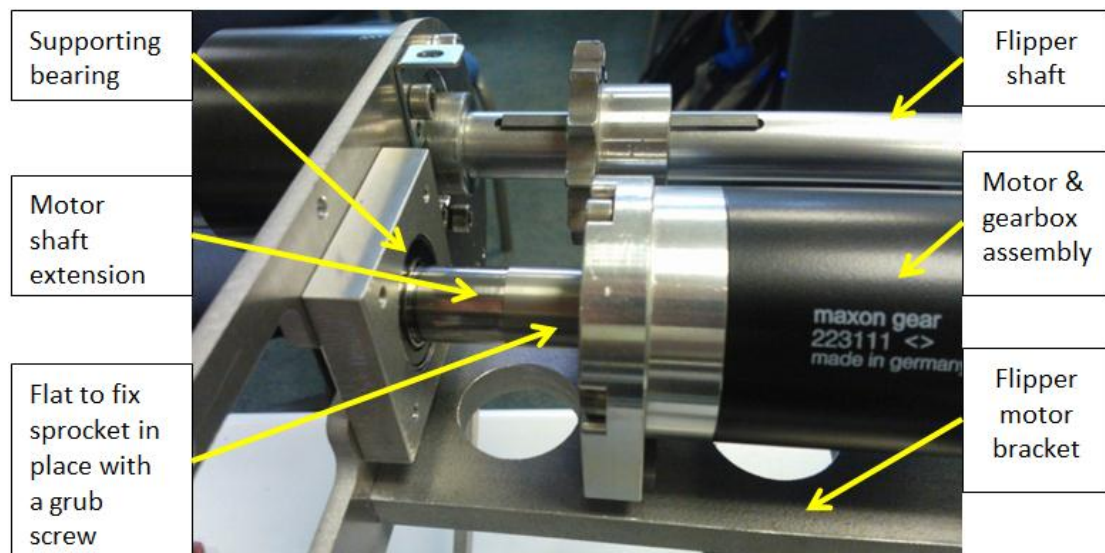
Motor shaft supporting bearing arrangement (view from the bottom).
